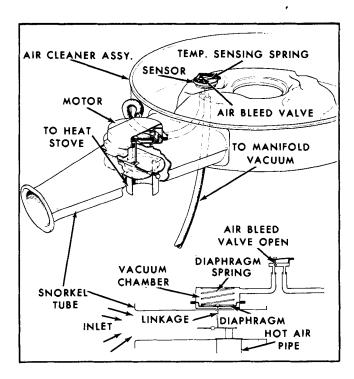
D-5 Auto-Therm Air Heater-Position During Hot Engine Operation
